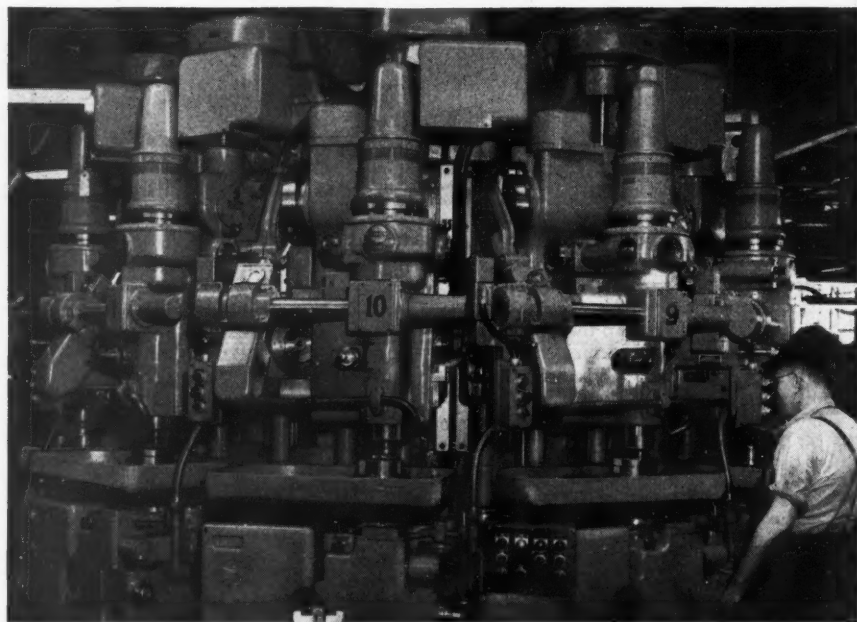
View of Fellows No. 10 Rotary Gear Shaper cutting Internal Helical Gear for an automobile transmission
